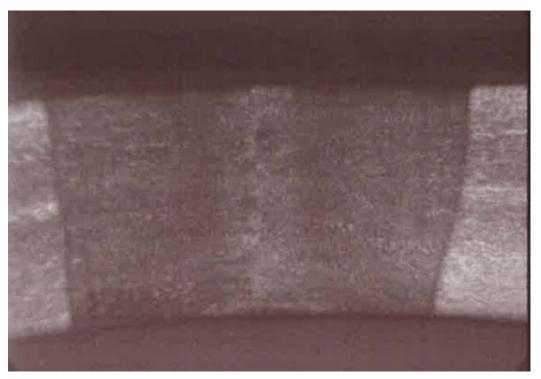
A metallurgical mount of the weld cross-section of a sample of straight length 1.50" OD tube was manufactured by a TIG (GTAW) welding process. Note that this weld shape is significantly different than that in Fig. 4, which was produced by the same tube manufacturer. This weld bead shape is less common in TIG welded tubes than that shown in Fig. 4.
